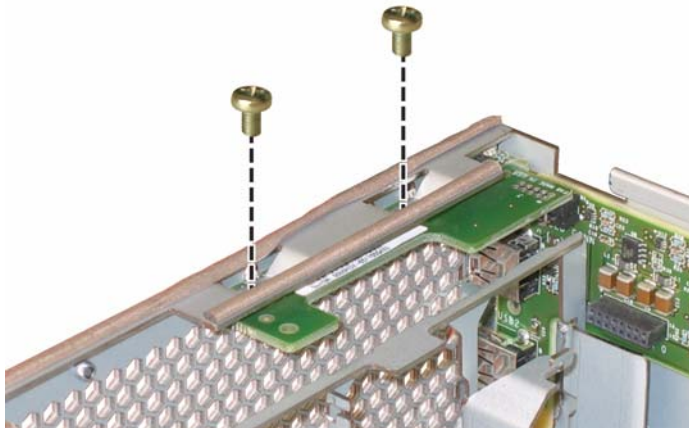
Removing the Front Panel Indicator Board Screws
